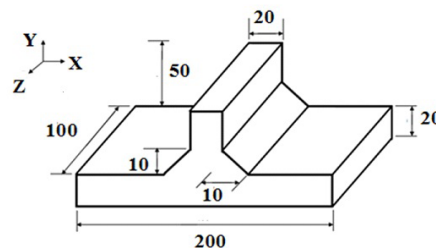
T-welded connections dimensions (unit: mm).
